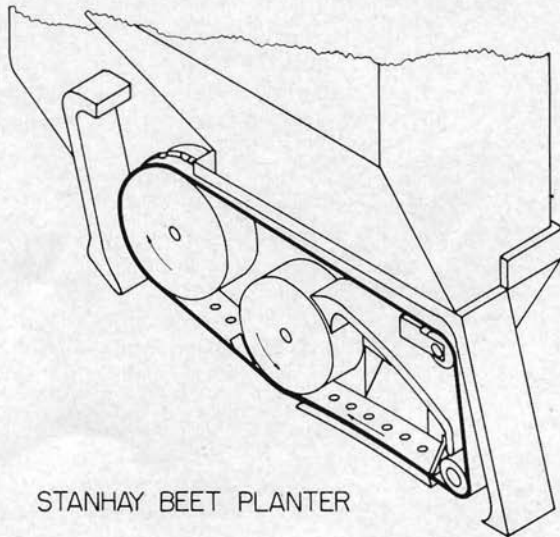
A drawing of the Stanhay planter showing the method of seed metering with a flat rubber belt and rotating seed cut-off wheel.
